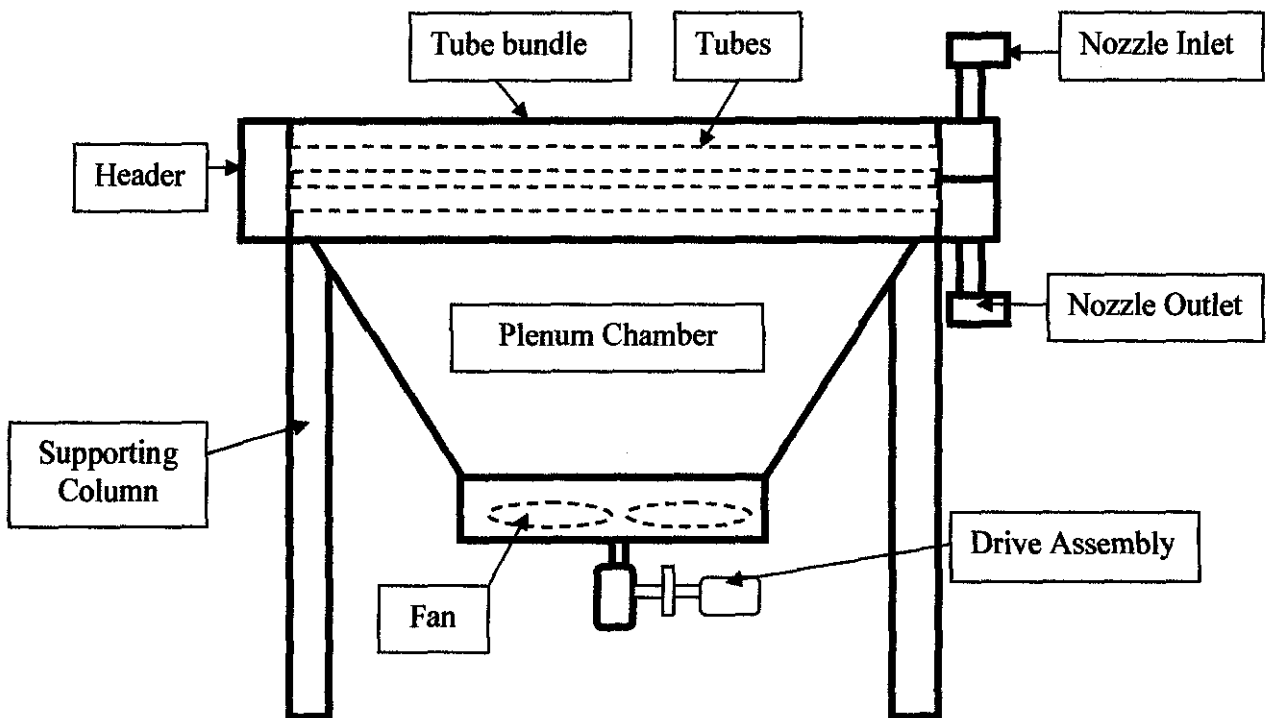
Component of Forced Draft Type, Aerial Cooler Heat Exchanger (redraw diagram, refer to PECAS Learning Material, Maintenance of Heat Exchangers)
